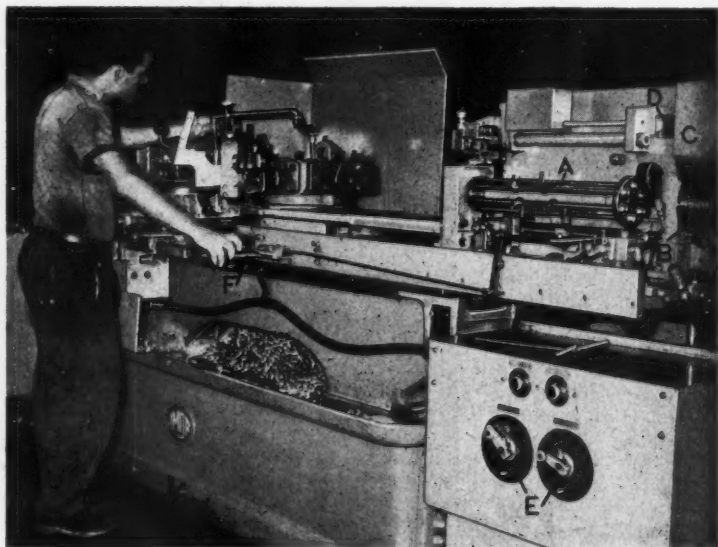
This prototype hydraulically operated, semi-automatic, turret lathe is employed in the main machine shop of the Santa Barbara works
